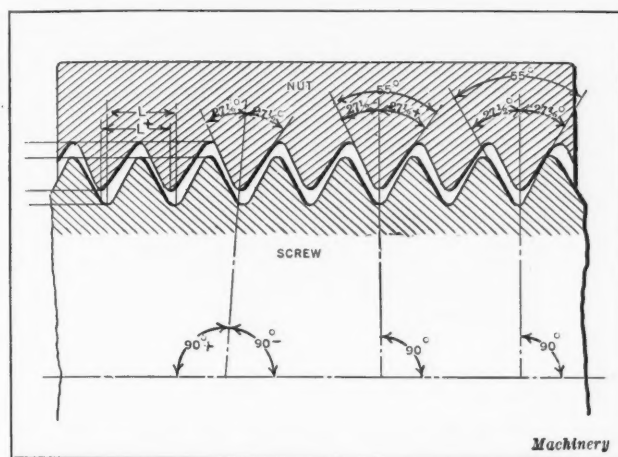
Incorrect Lead in Nut; Thread Angle of Correct Measure, but not Symmetrically Located Relative to Center Line of Nut; Correct Lead and Thread Angle in Screw
